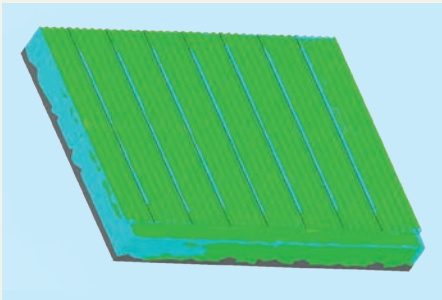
Measurement of the manufacturing accuracy of the whole tool insert with the KolibriMulti System
